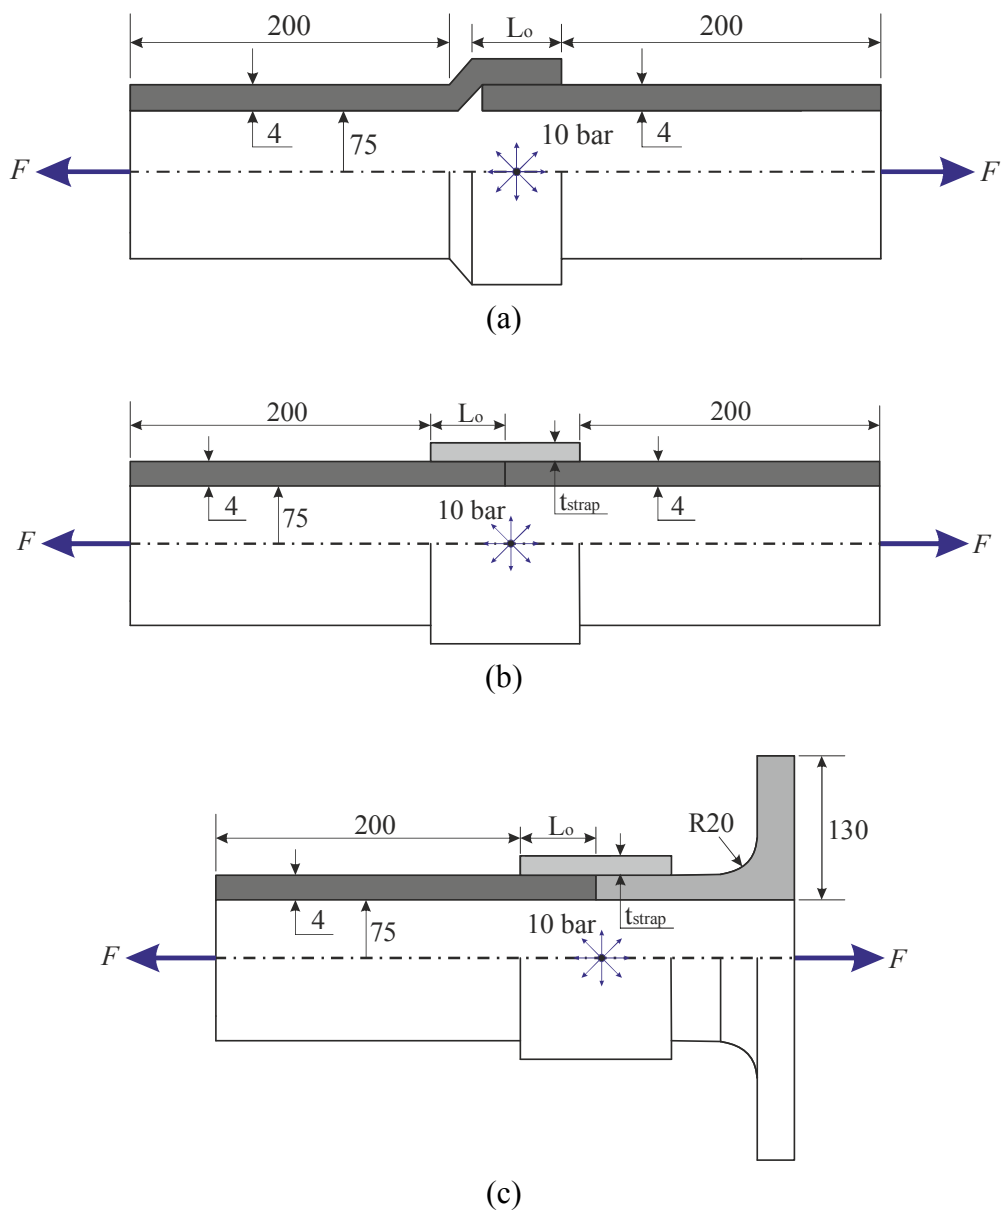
Tube-to-tube SLJ (a) and SSJ (b) geometries and tube-to-flange SSJ (c) geometry adopted in the numerical parametric study (all dimensions in mm).
